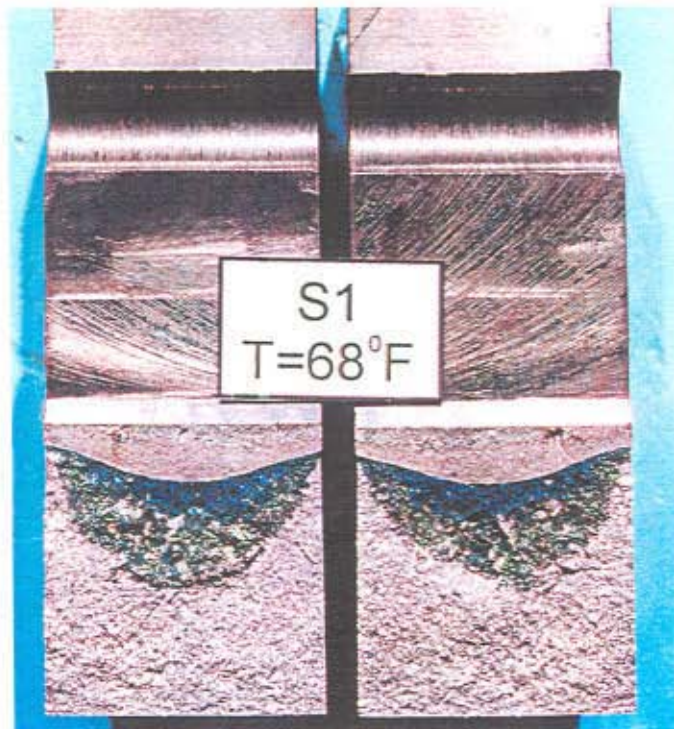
Fracture Surfaces of Test Specimen S1. (6/00/2-5)
